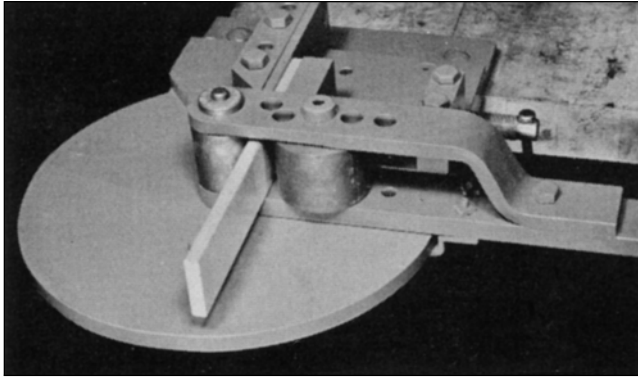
A—Wraparound Testing Machine with an Aluminum Test Sample Loaded and Ready to be Tested
